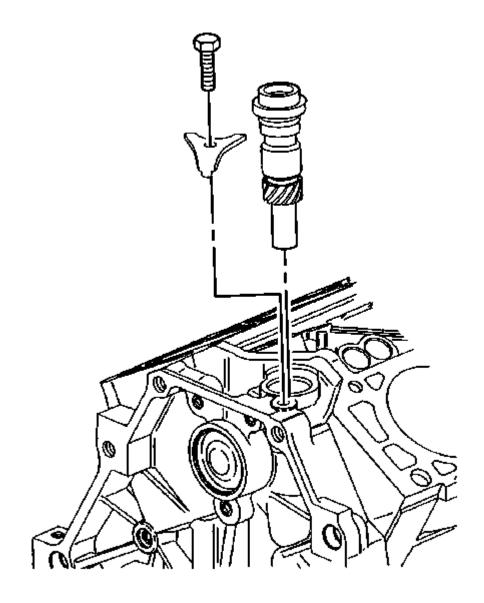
Installing Oil Pump Drive Courtesy of GENERAL MOTORS CORP.
